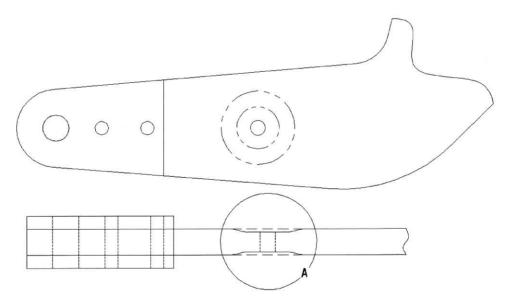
Arm Rework at Bonding Strap Fastener Hole only
